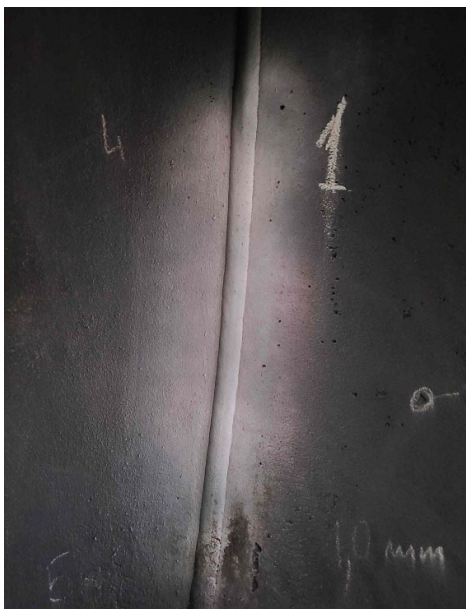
Liquid penetrate inspection performed on weld 1
